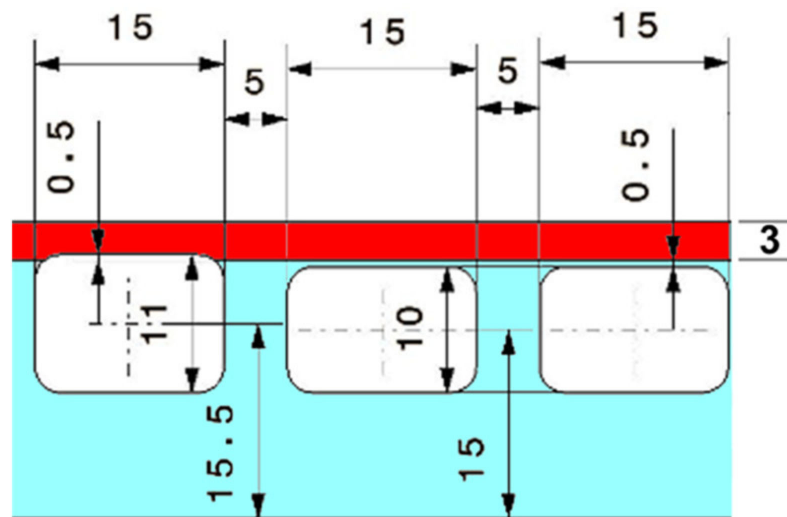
Dimensions of the mock-up plate and geometry of the cooling channels. The cooling channel cross-sections are 10 mm (height) by 15 mm (width) with a 2 mm radius at the corners. The channel in the middle (the left one in the drawing) is higher by one millimeter compared to the other four. That is, this channel exceeds the baseplate of EUROFER97/2 (cyan) and is machined into the ODS steel plating (red). Therefore, the diffusion bond-lines run along both upper corners. This means that we have placed the potentially weakest points (the weld seam) in the area of highest stress (this is due to stress concentration along the 2 mm radii of the corners).
